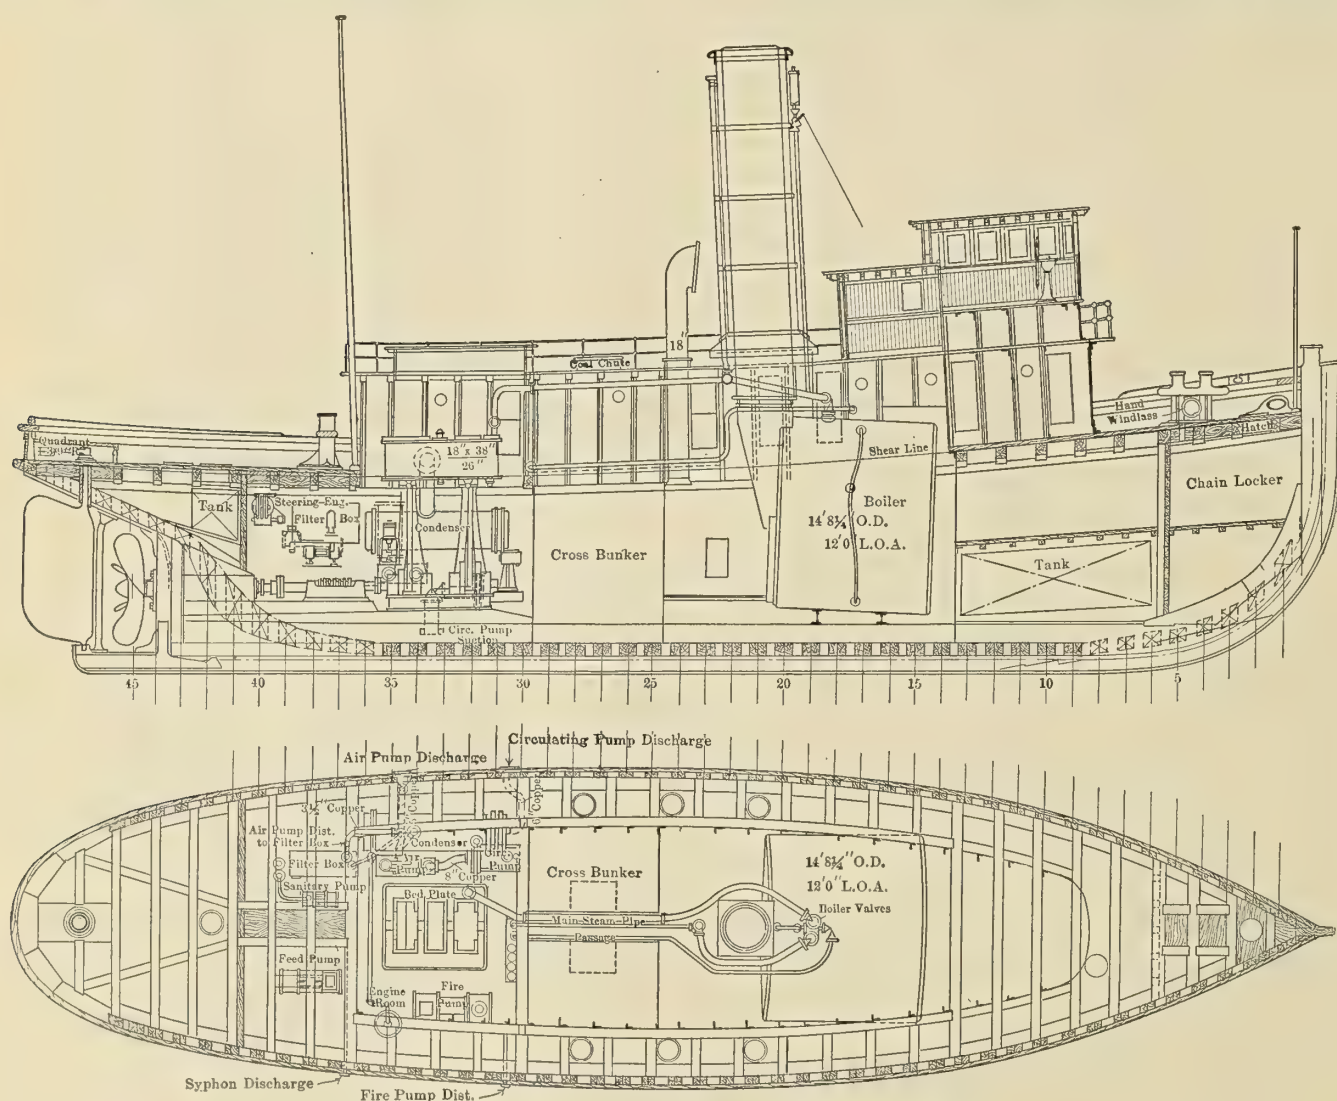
General Arrangement Plans of 100-Foot Wooden Tug
